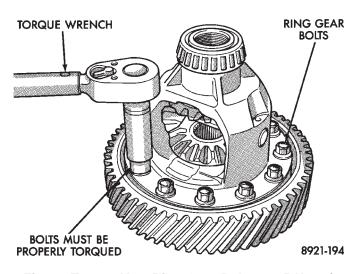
Torque New Ring Gear Bolts to 95 Nom (70 Ft. Lbs.)
